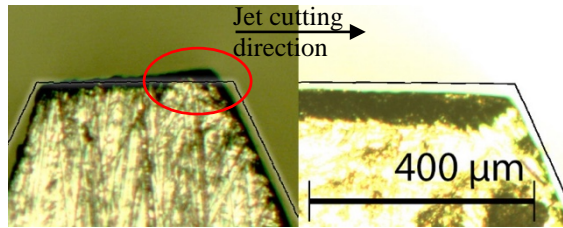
Bottom geometry Side A material removal. Gear A (left image) and gear B
